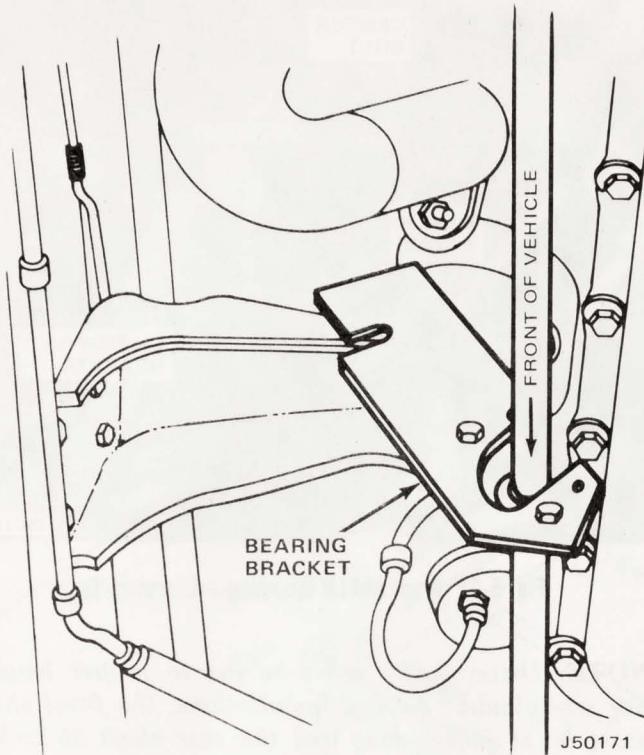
Bearing Bracket Installation—V-8 Engine
